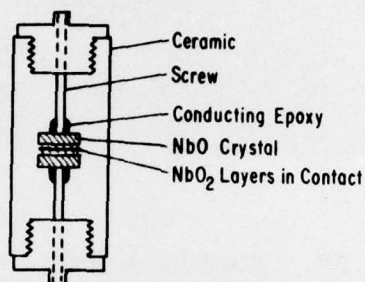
Construction of back-to-back NbO_2/NbO devices.
